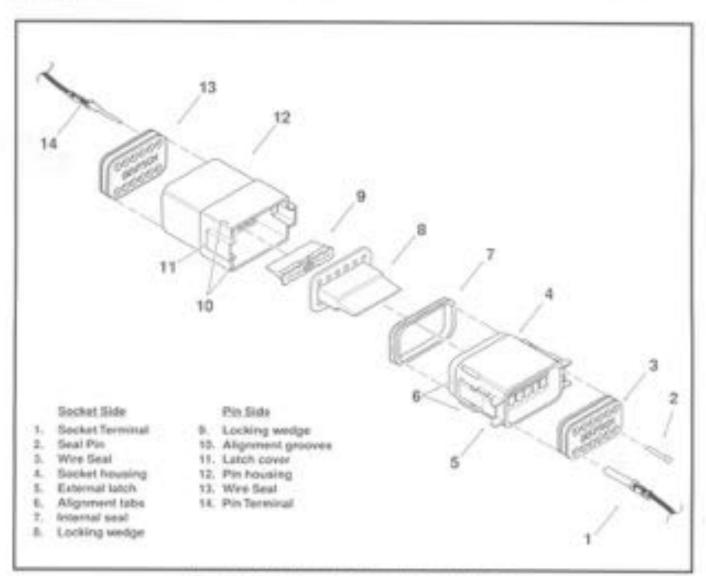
, 12-pin Deutsch Connector (Exploded View)
